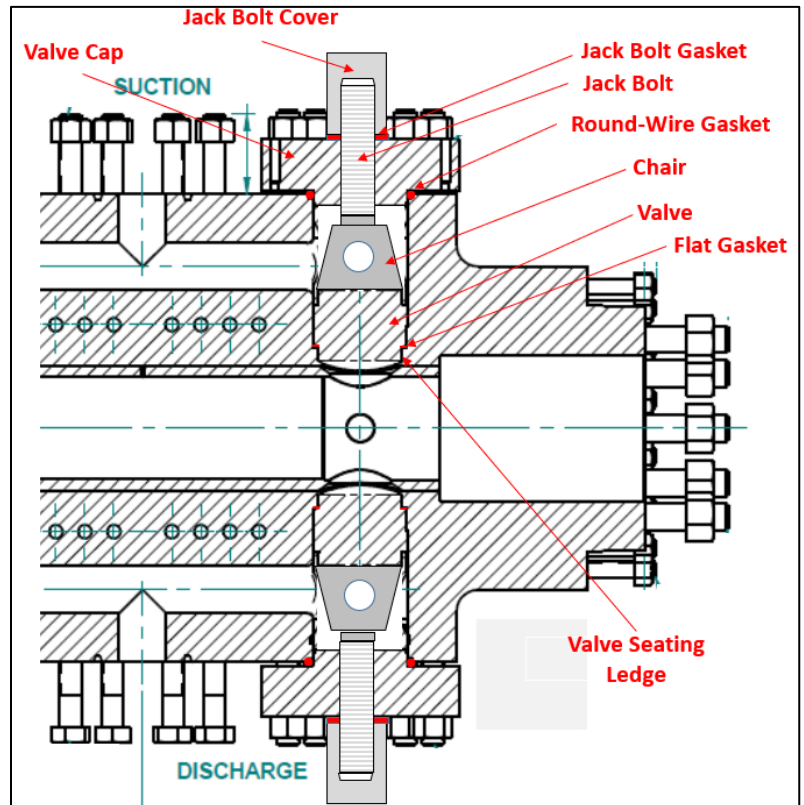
Valve Assemblies Retained by Jack Bolt Valve Caps
